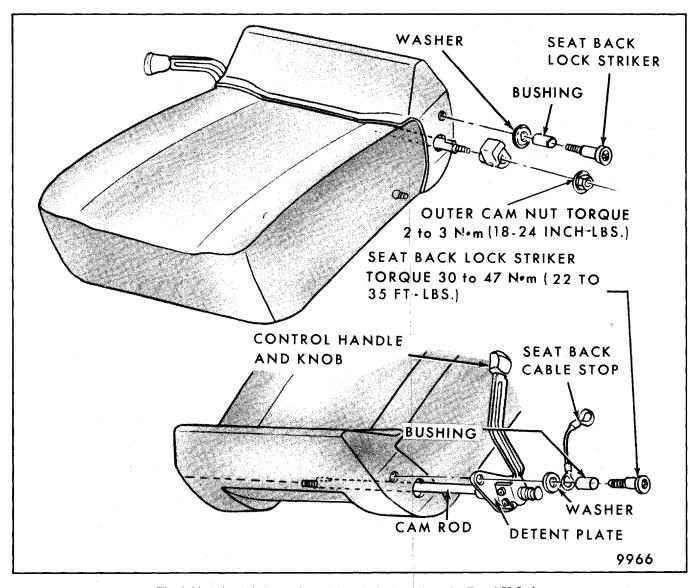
Adjustable Front Seat Back Assembly - Chevrolet F and H Styles
